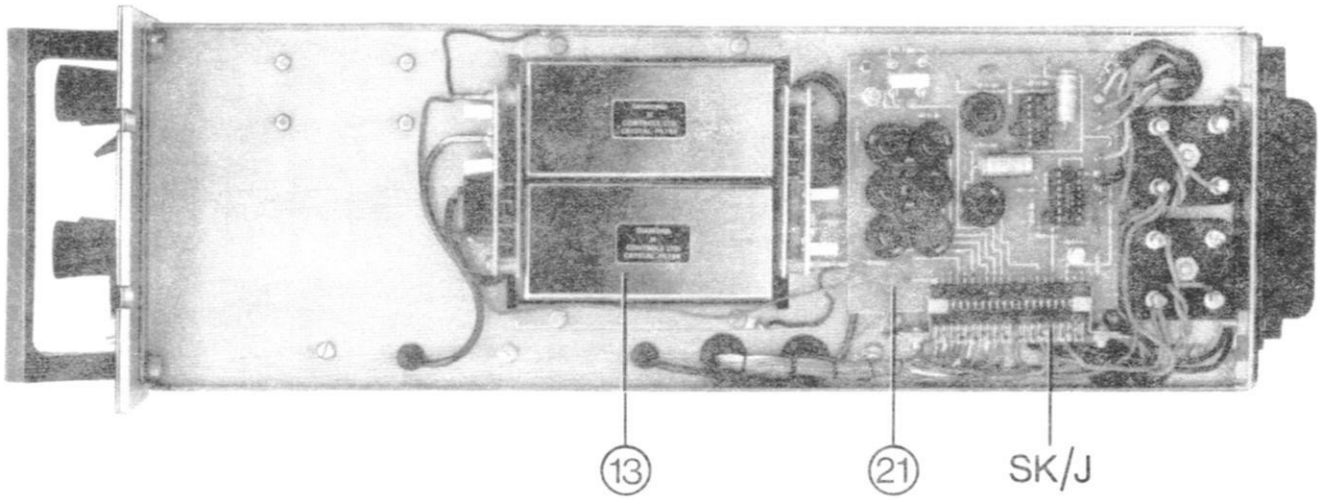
Side elevation with cover removed showing SSB Filter Assembly, Meter/Regulator Board and Bridge Rectifiers D43 and D44.
